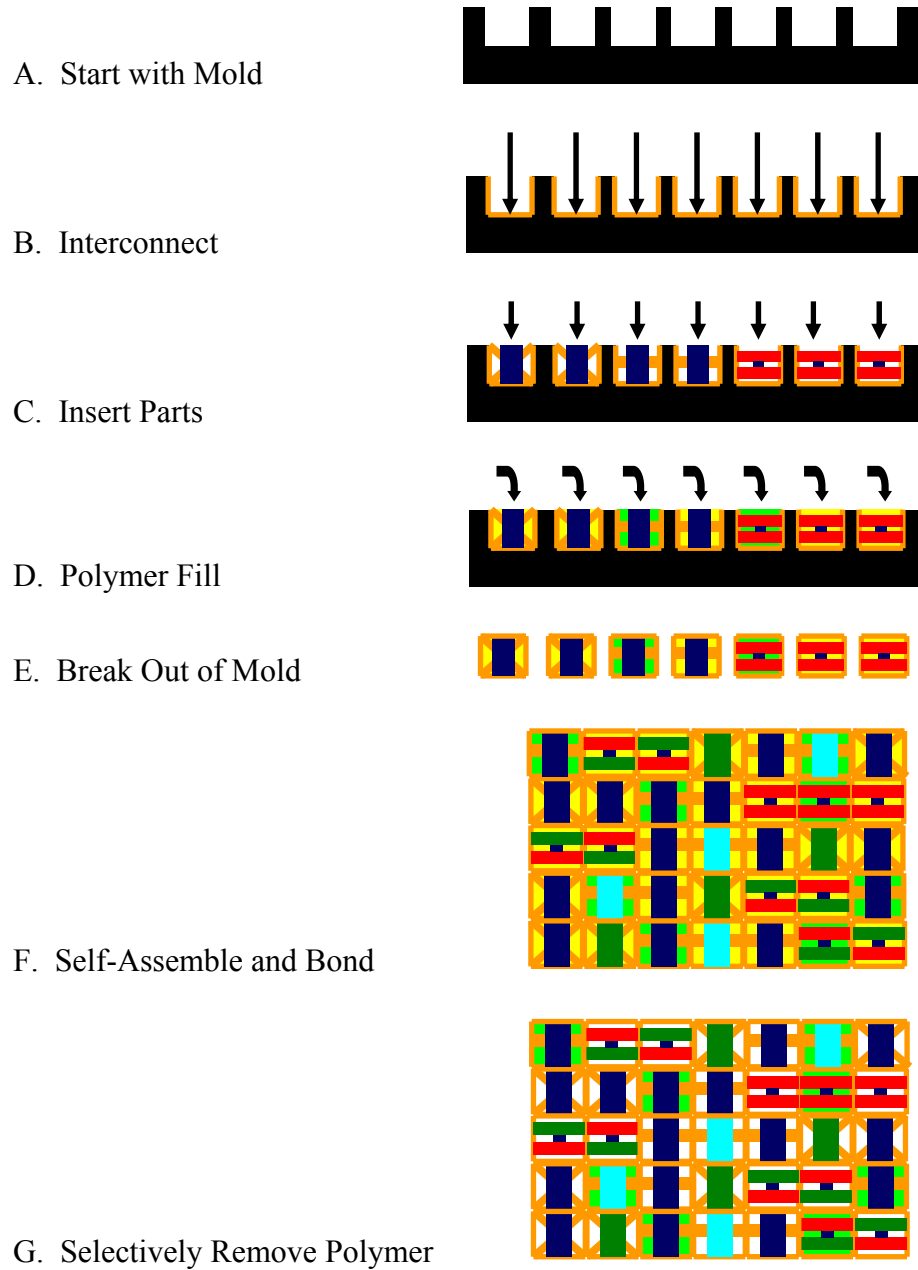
Manufacturing Strategy for Small Part Encapsulation and Self-Assembly: An interconnect is laid down in a mold. Small parts are inserted and soldered to the interconnect. Different polymers fill the mold, the structures are broken out, self-assembled & bonded, and the polymers can be selectively dissolved.
